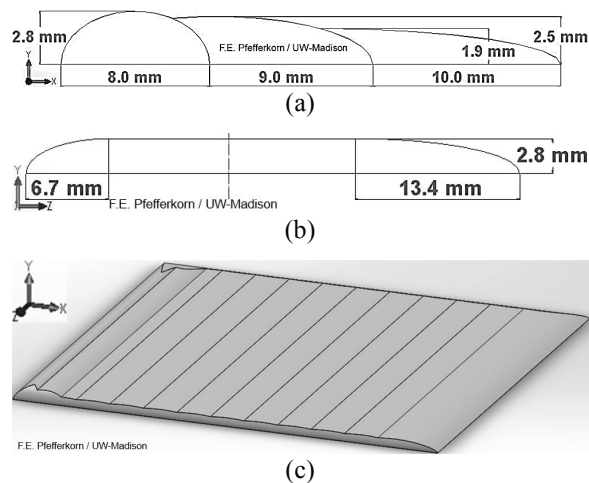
GMAW deposition bead geometry diagrams: (a) cross section of 3 initial beads (b) side profile across bead length (c) CAD model of deposition layer
